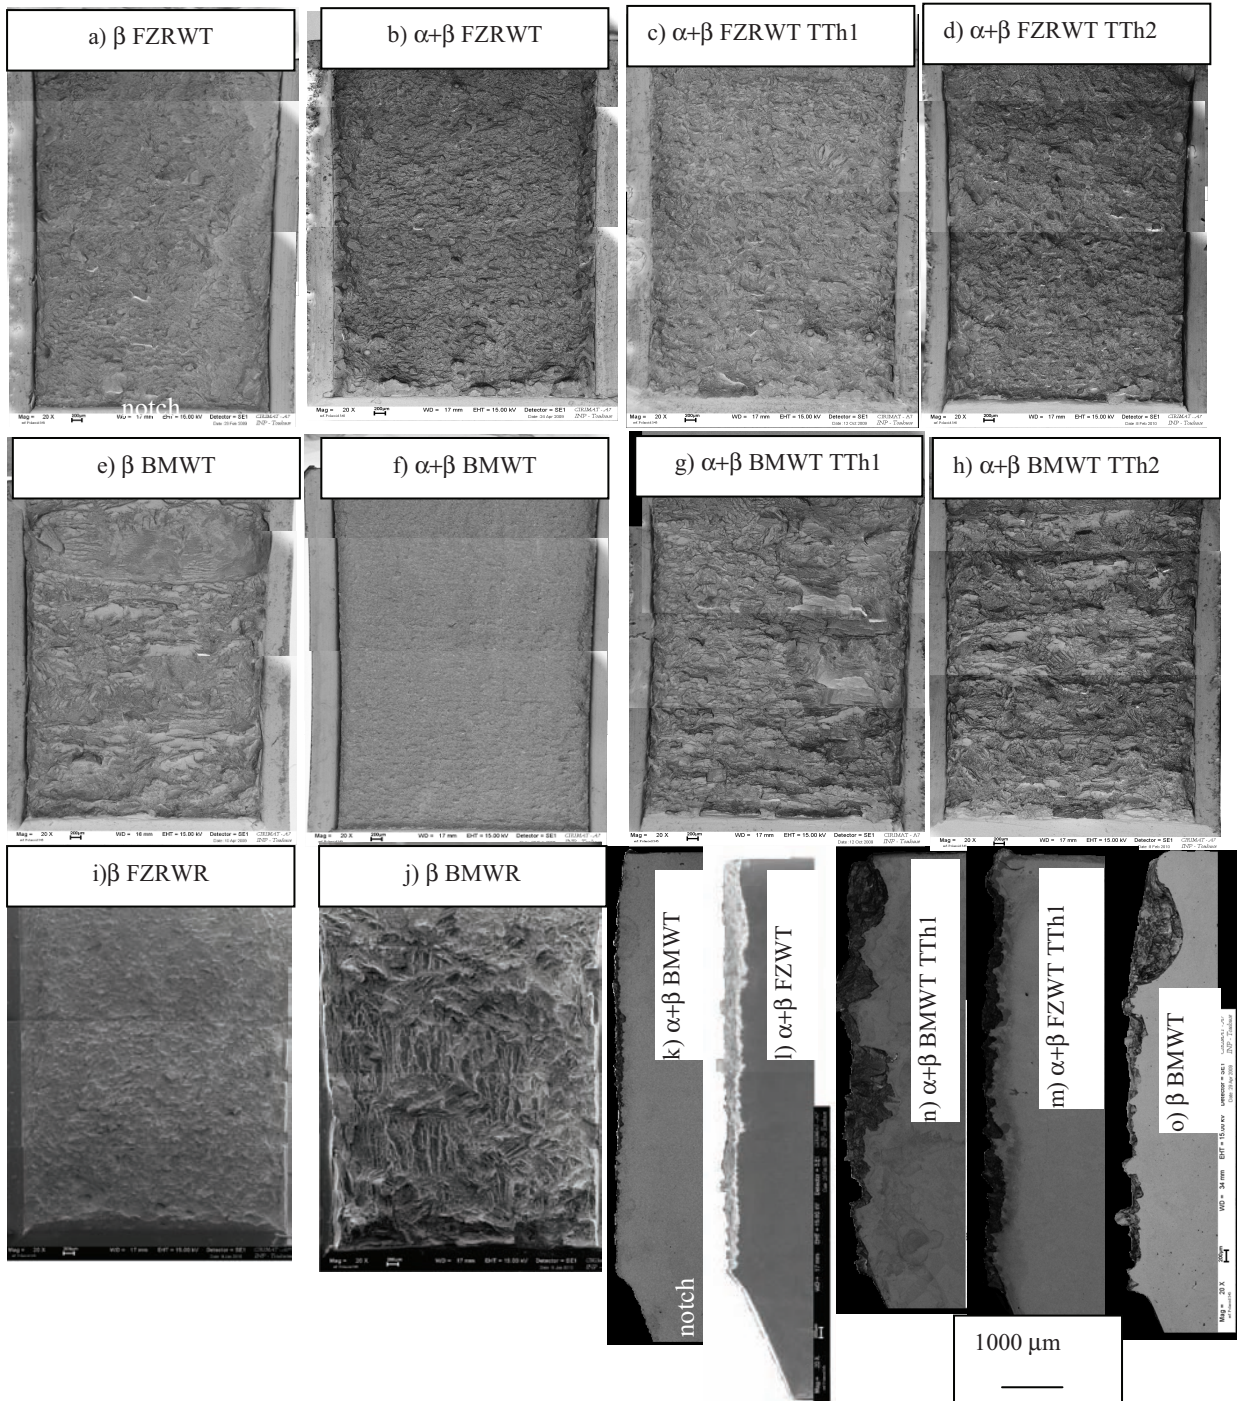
Fracture surfaces and crack paths view in a median cross section perpendicular to the fracture surface of impact toughness specimens.
